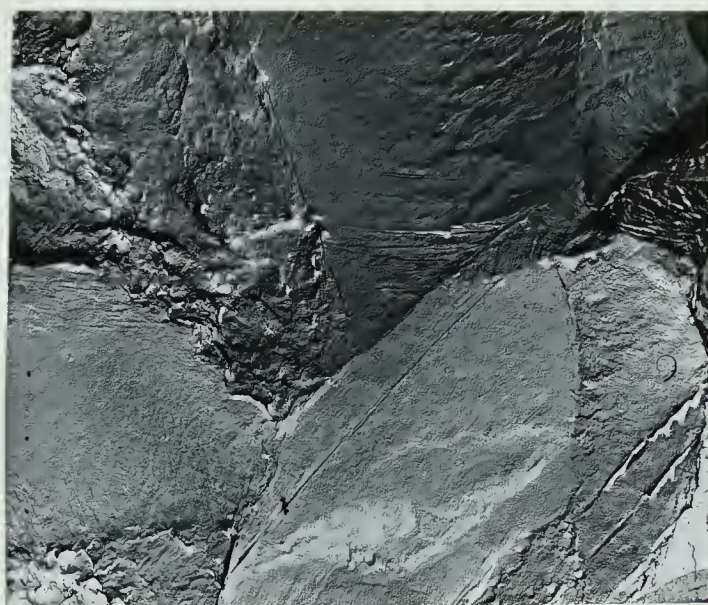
Fracture surface produced in nitrogen under
